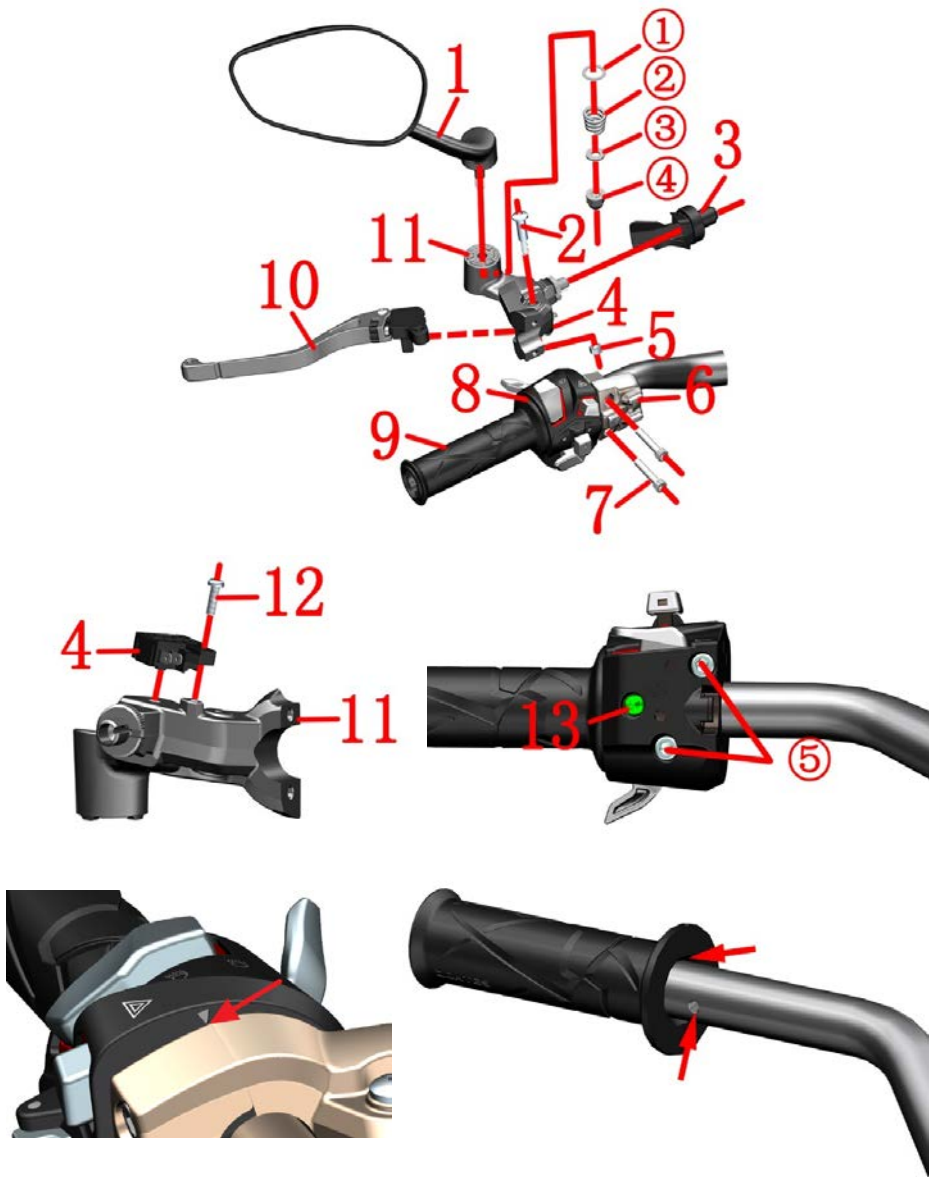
Front Fork Assembly		Left Handlebar Assembly		CHK ADJ	CAUTION
